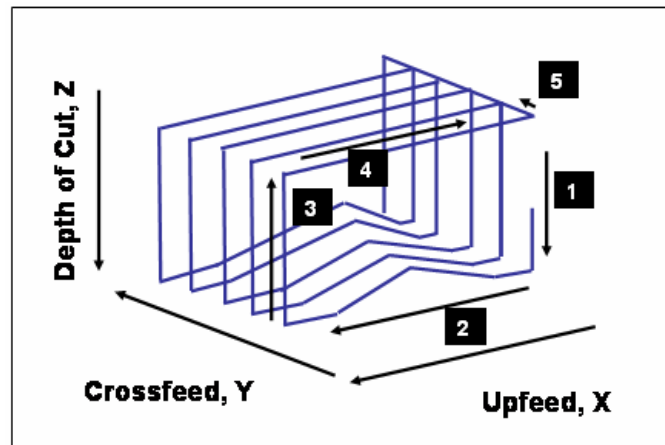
Raster machining of a part with 3-D geometry. (1) Move to contact workpiece (2) Upfeed cutting pass with variable depth of cut to machine contoured surface (3) Withdraw from workpiece (4) Backfeed (5) Incremental crossfeed move to position for next pass.
